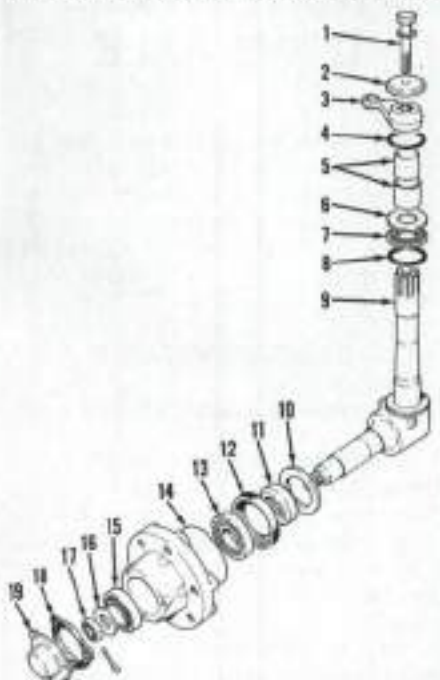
Exploded view of typical front spindle assembly showing component parts and their relative positions.
